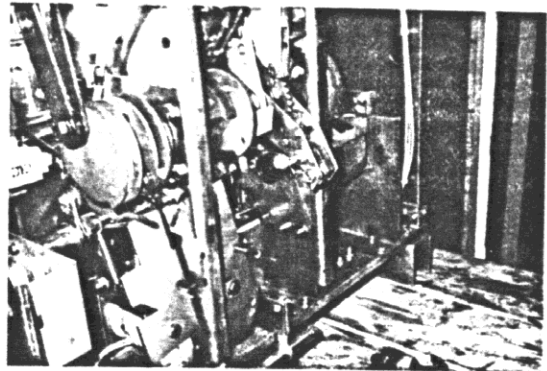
Remove With the Help of Special Pliers as Shown
